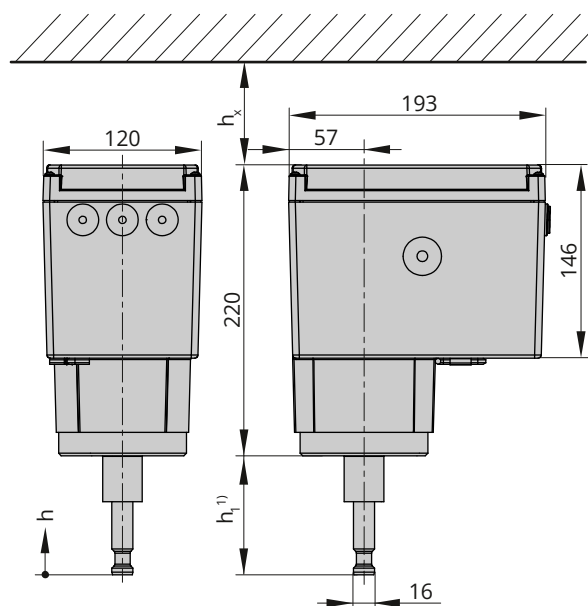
Dimensions in mm · Type 3374-15, -17, -26 and -36 (form A)
